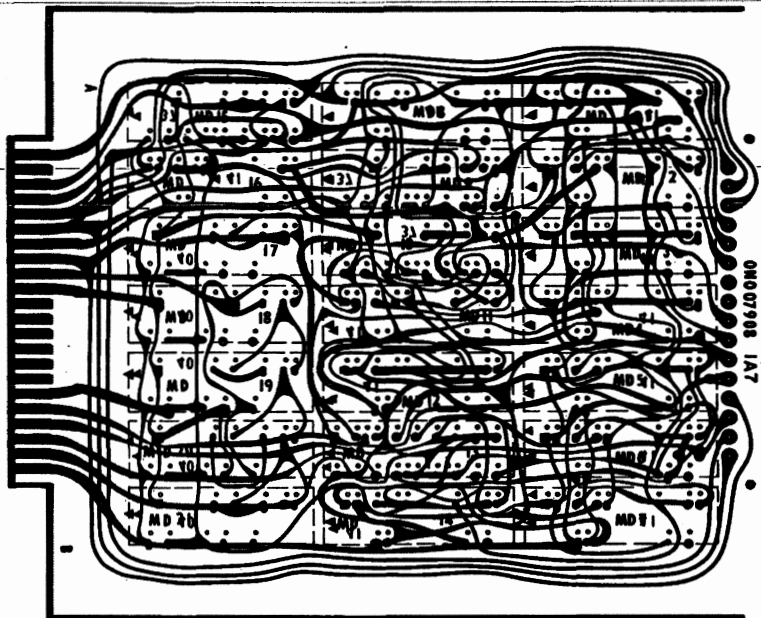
Card E-AJQ Printed-Circuit Layout.
